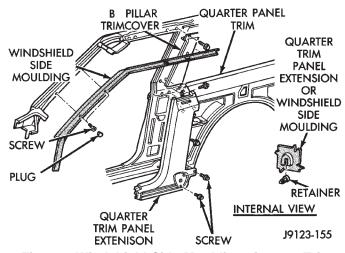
Windshield Side Moulding, Quarter Trim and Extension Panels
